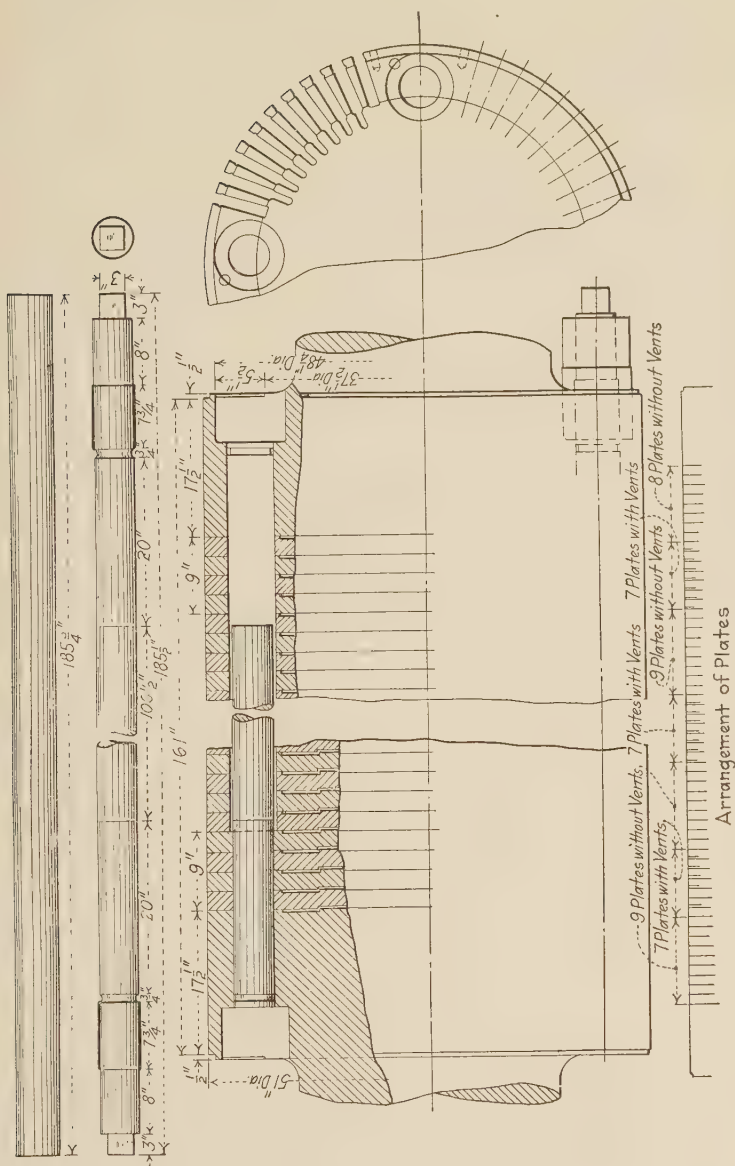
Turbo-rotor construction—made up of rolled steel plates rabbited together.
